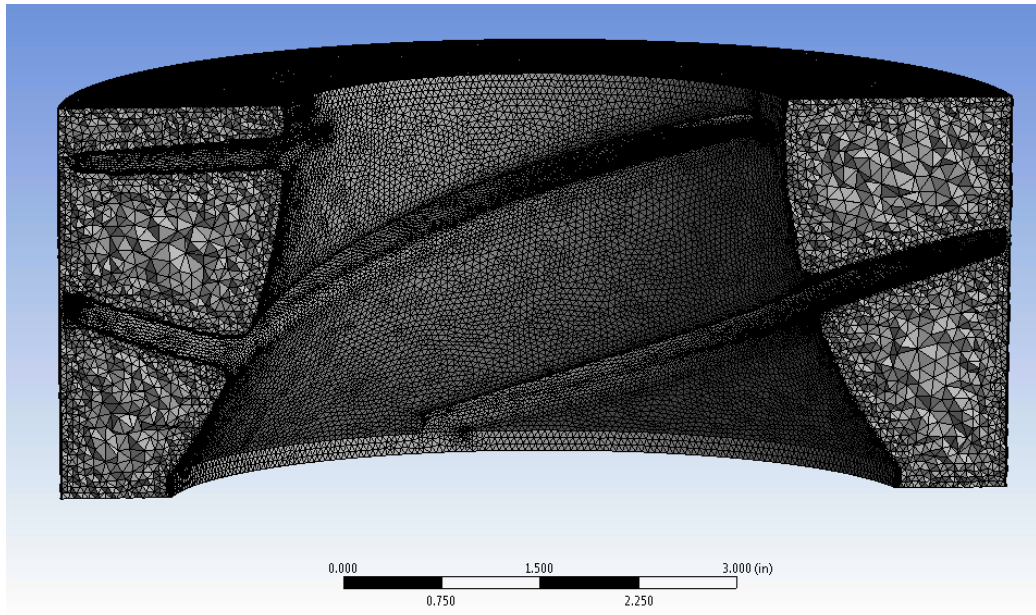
Geometry of Eroded Impeller of 1st Stage-Sectional View
